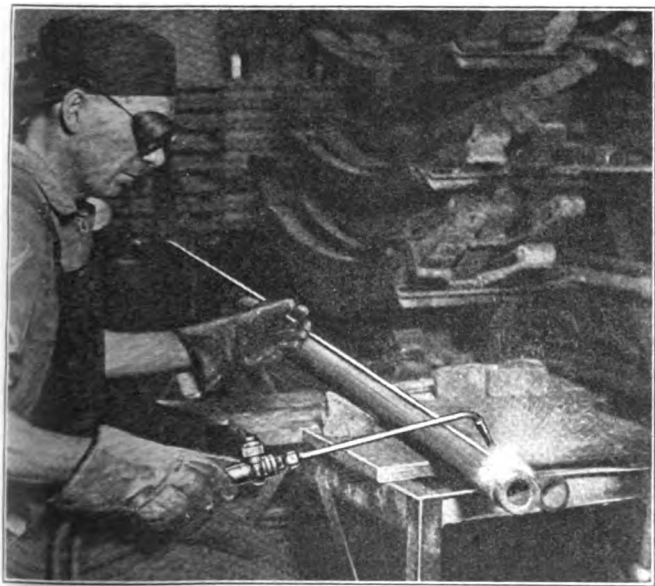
A "PUTTING-ON" TOOL WELDING METAL ON A WORN OUT TORQUE SHAFT
